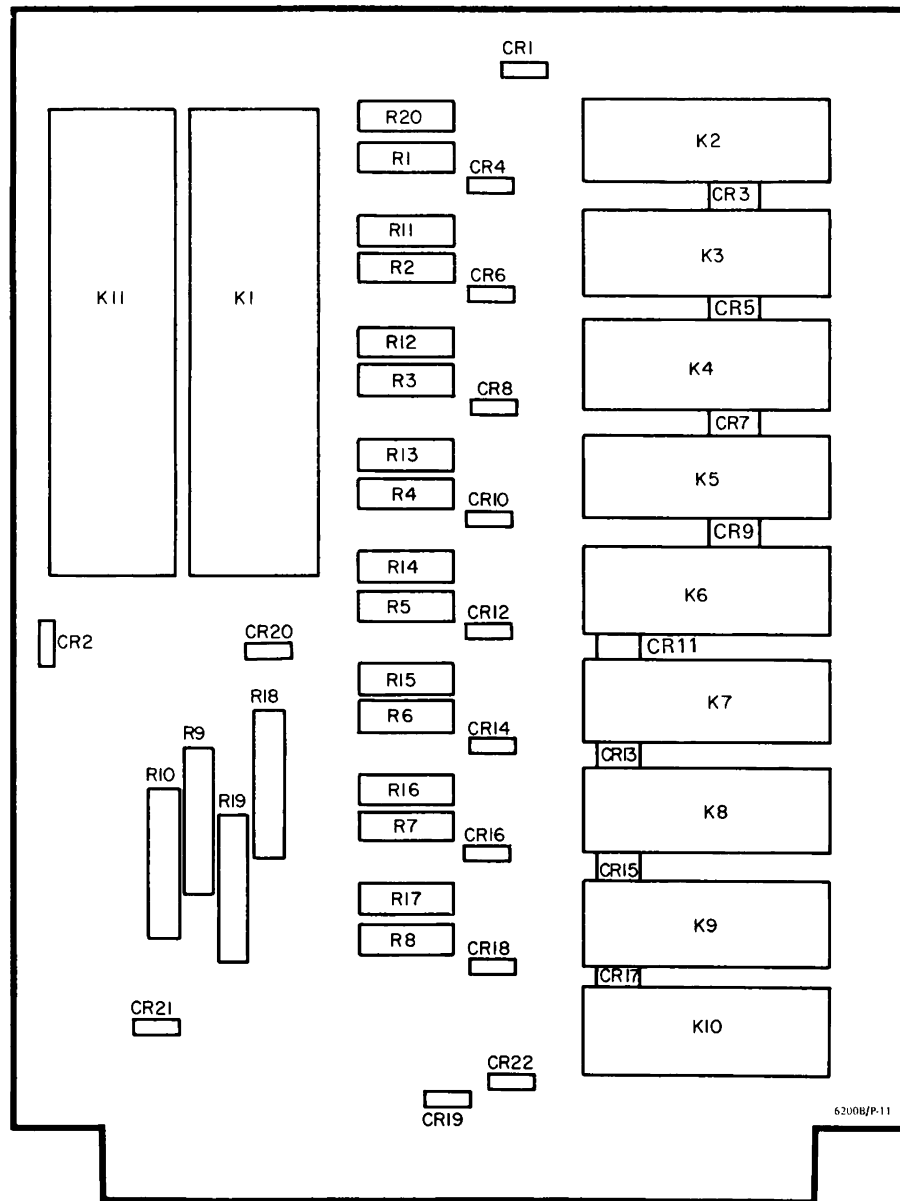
Component Location, Collector Voltage Relay Assembly A6
